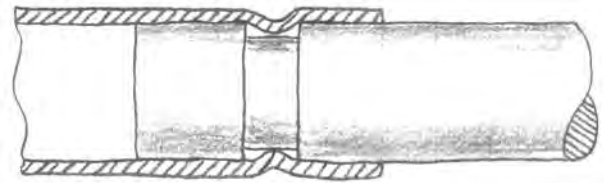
F4f-2 Crimping used to fasten a length of tubing to the end of a rod.
